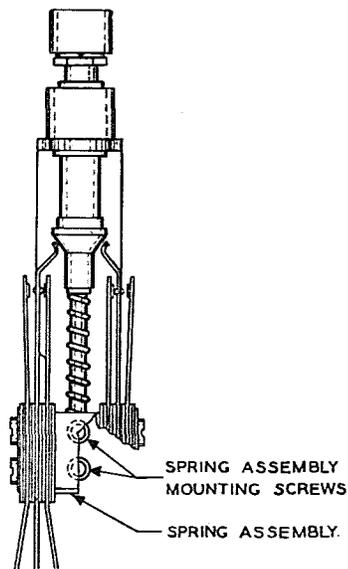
Position of Spring Assembly Mounting Screws for the 576-, 579-, 582-, and 583-type Keys (No. 576A Illustrated)
